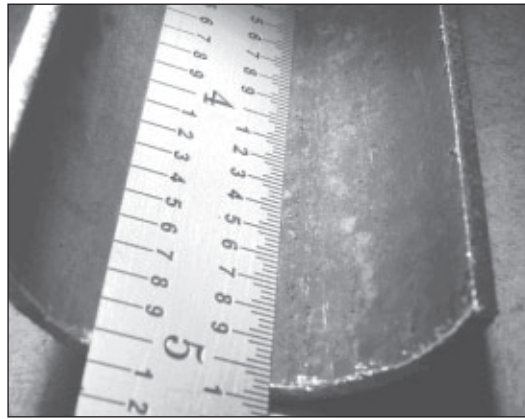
Pitting Caused by Corrosion in Stainless Steel Tube
